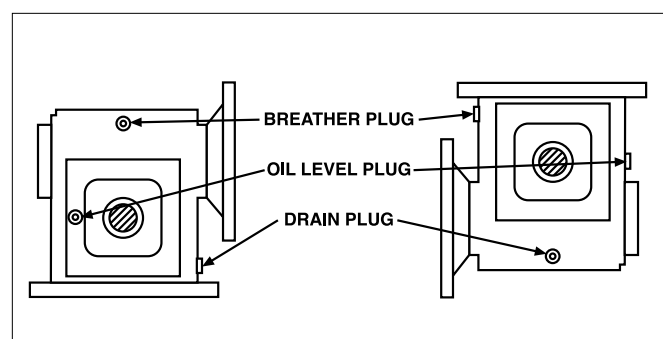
GEARBOX SCHEMATIC (TYPICAL)
